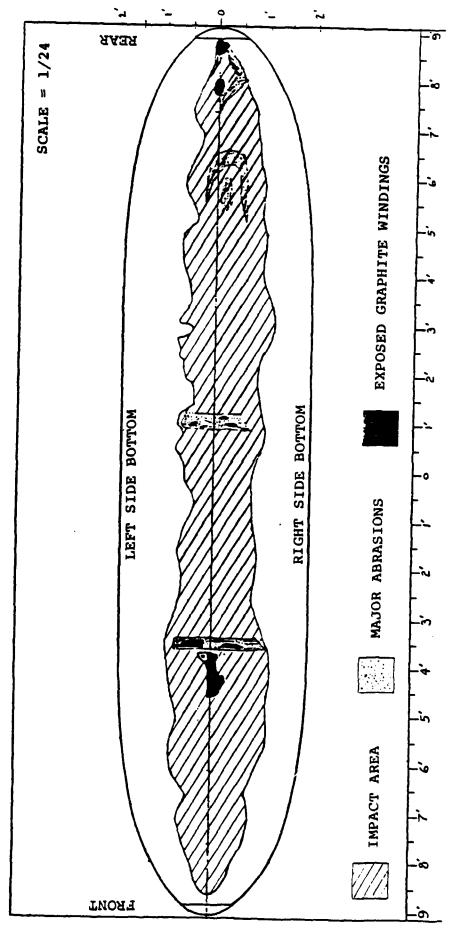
FUEL TANK SN0004 IMPACT IMPRINT SKETCH.
